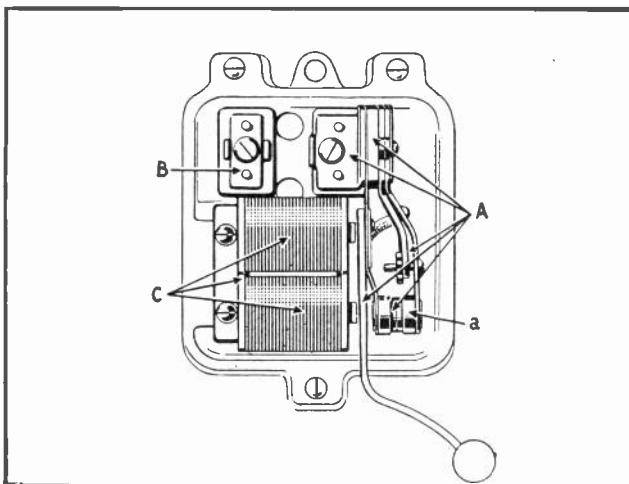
Heavy duty bell frame and parts. Note the extra heavy carbon contacts for making and breaking the circuit at "A."
